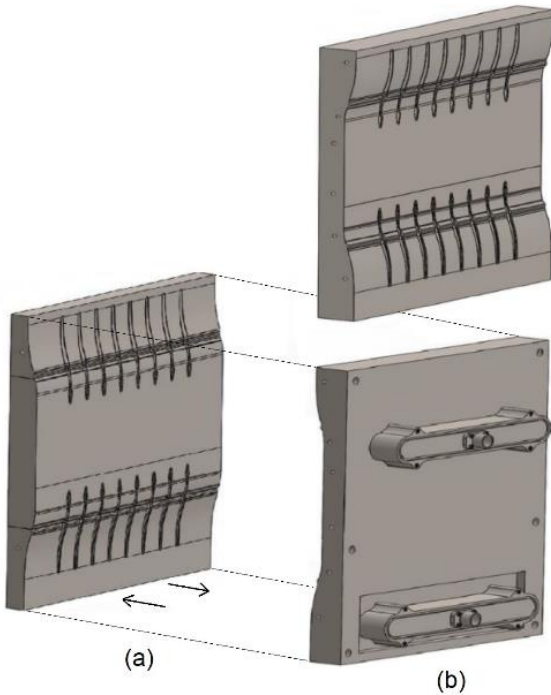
a) Front view of the core plate, b) Front and back views of the cavity plate and hot runner manifolds
